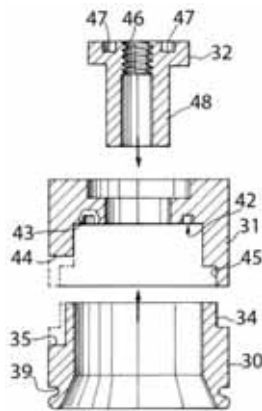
Exploded sectional view of the tail mass assembly of the transducer [13]
